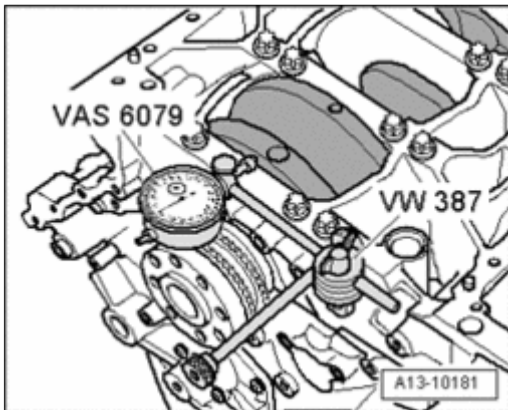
Securing Dial Gauge VAS 6079 With Dial Gauge Holder VW 387 To Cylinder Block
